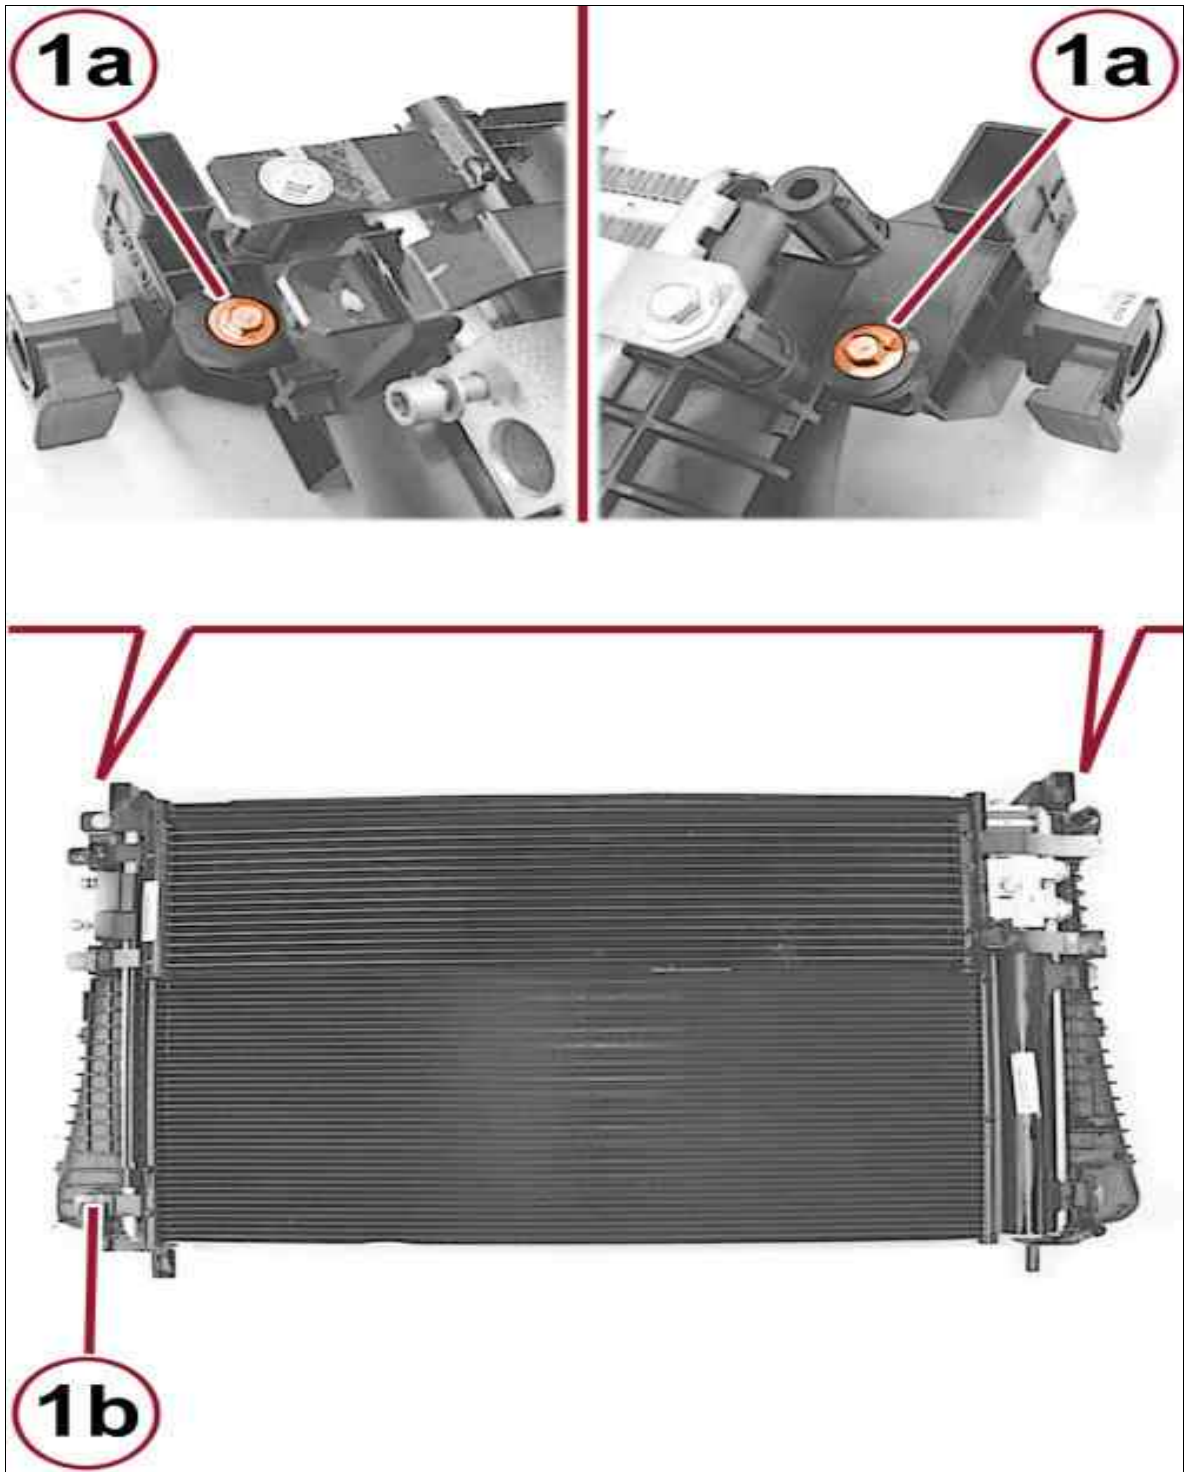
A/C Condenser/Transmission Oil Cooler & Pins
